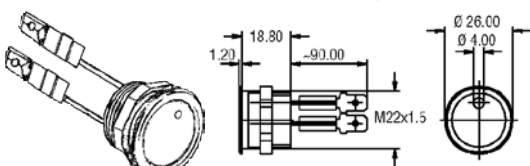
Vandal-Proof Piezo or Electro-Mechanical Switch with Travel (Metal)
